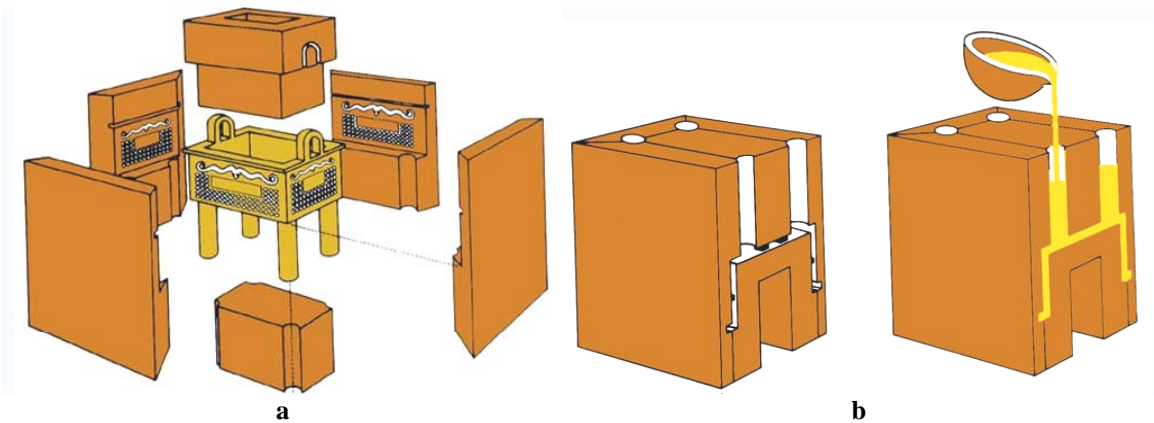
(a) Mold assembly for casting a *fang ding* where a model (center) is surrounded by the four panels that make up the mold. The inner core and interior leg core sections are shown above and below the model; (b) the leg cores are kept apart with chaplets depicted as black squares. The mold is joined together and inverted for molten metal to be poured into a leg opening [7, 21].
